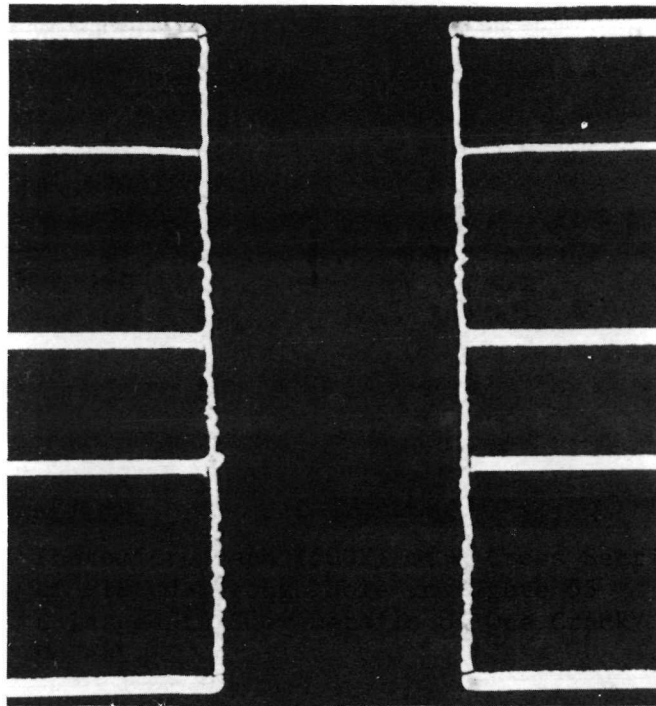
Photomicrograph (36X) of a Cross Section of Plated-Through Hole with Crack Defects Used to Obtain the Data in Figure 52.
